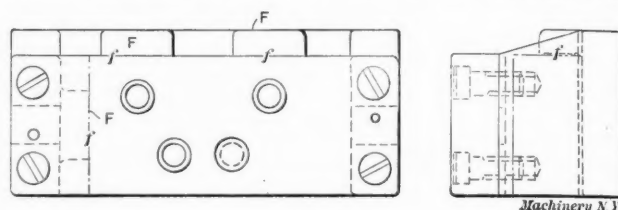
Alternative Design of Jig shown in Fig. 86.
